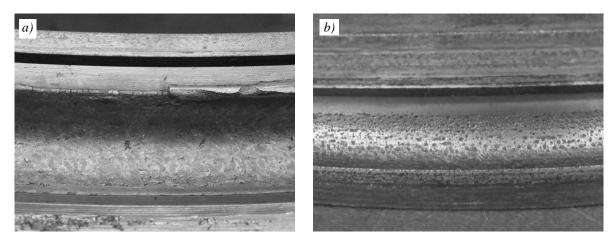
The traces of pitting on the race of a ball bearing: a) double-row, b) single-row
